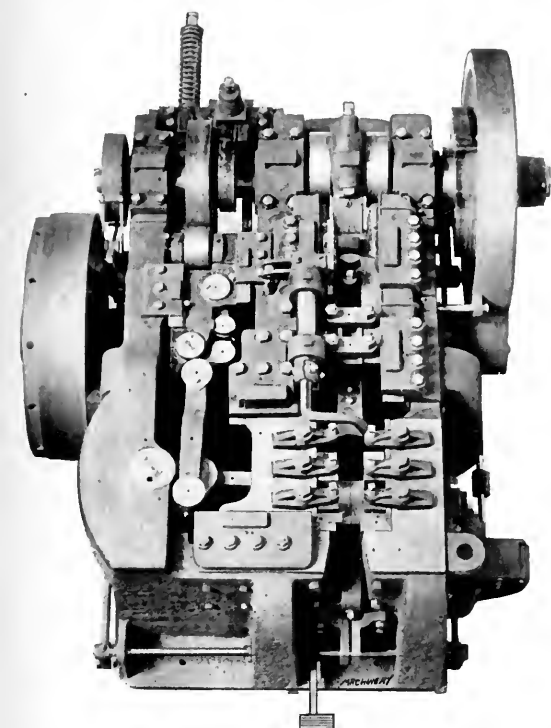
Top View of "National" Heavy-pattern Forging Machine, showing Method of operating the Gripping Mechanism and Heading Slide
